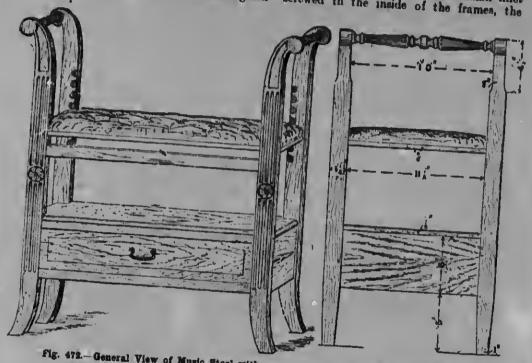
General View of Music Stool with Shaped Posts and Rising Seat.
